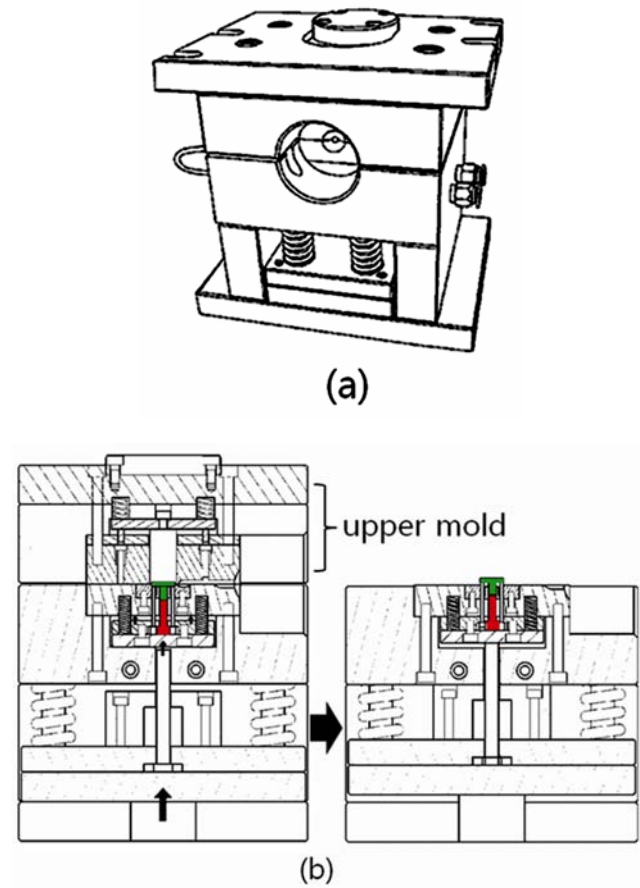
(a) A perspective view of the monolithic mold and (b) cross-sectional view illustrating how to separate samples from mold
